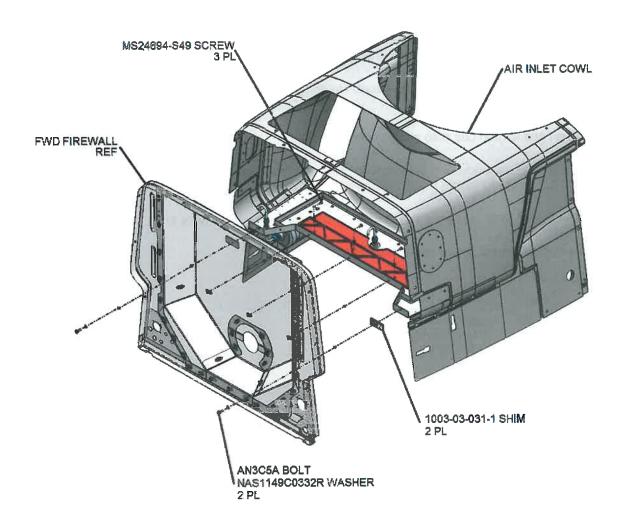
1003-02-001-1 Bypass Assembly Removal/Installation
